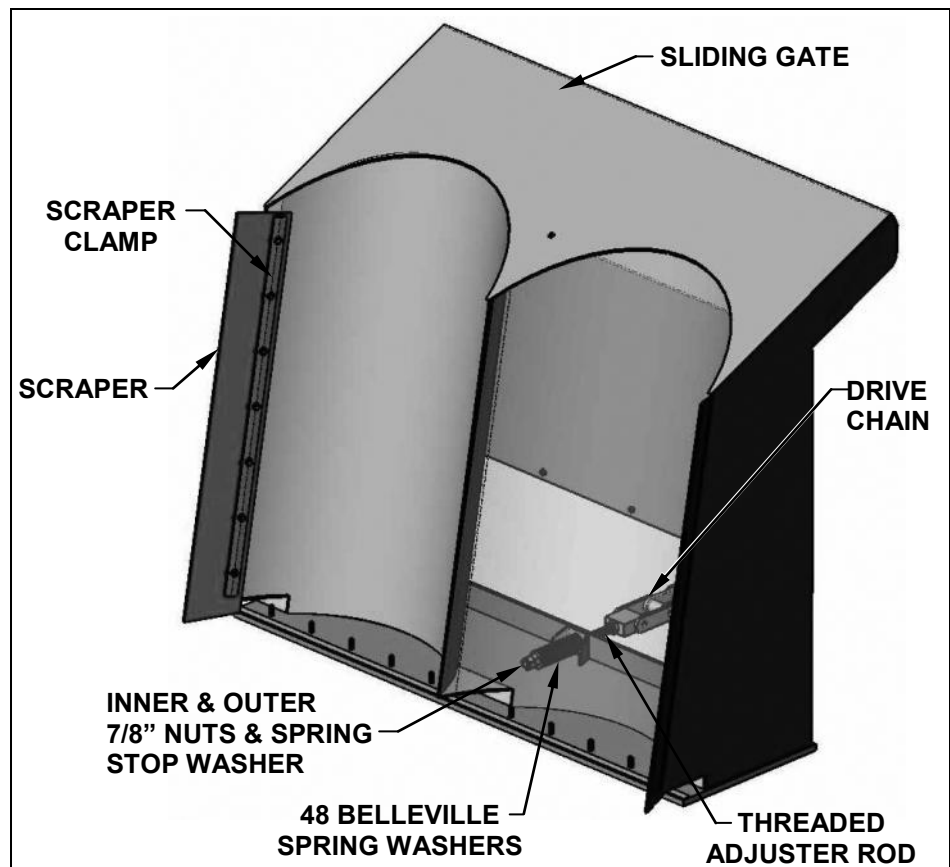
ADJUST DRIVE CHAIN & SLIDING GATE
